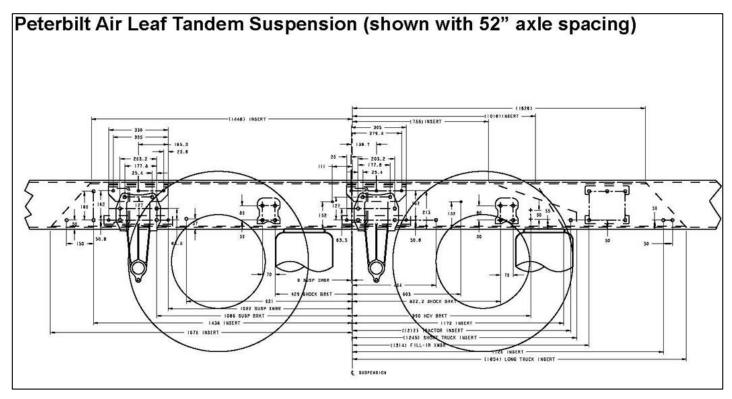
Peterbilt Air Leaf Tandem Frame Drilling (Dimensions In Millimeters)
